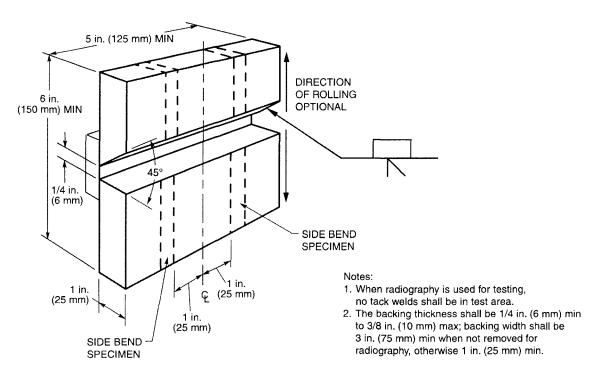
Optional Test Plate for Unlimited Thickness— Horizontal Position—Welder Qualification
